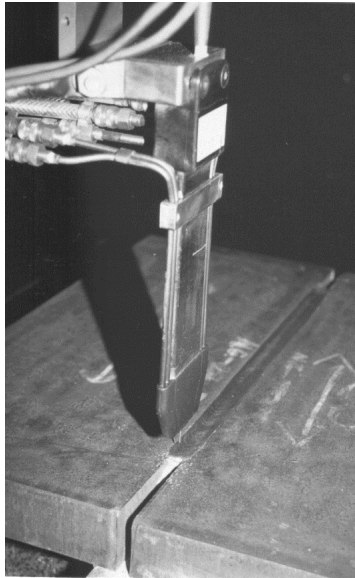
Photograph of the narrow gap welding equipment used to butt weld the 50 mm Q&T steel plate
